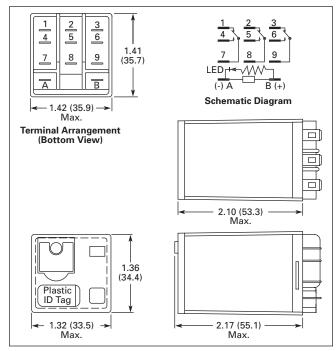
D5PF3 — Approximate Dimensions in Inches (mm)
